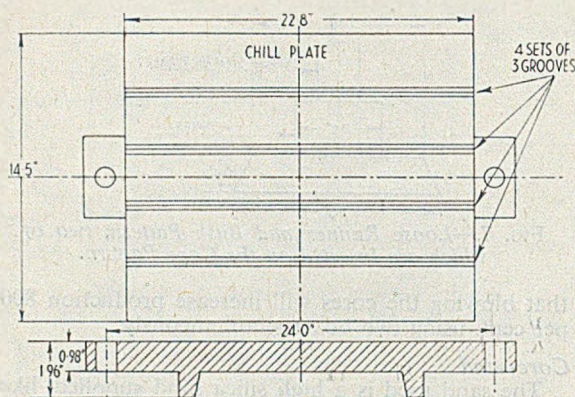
Cast-iron Chill Plate which makes the Base of the Tappet Mould; it is Grooved for Venting.
